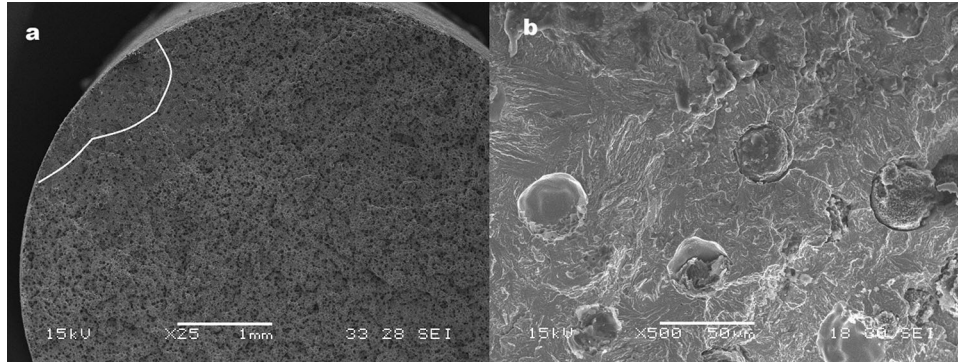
Fracture surface of an ADI sample tested in wet condition
